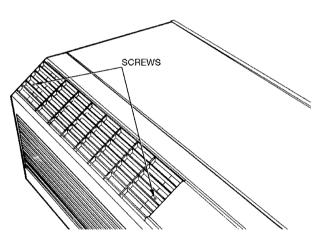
REMOVING AIR DISCHARGE GRILLE
